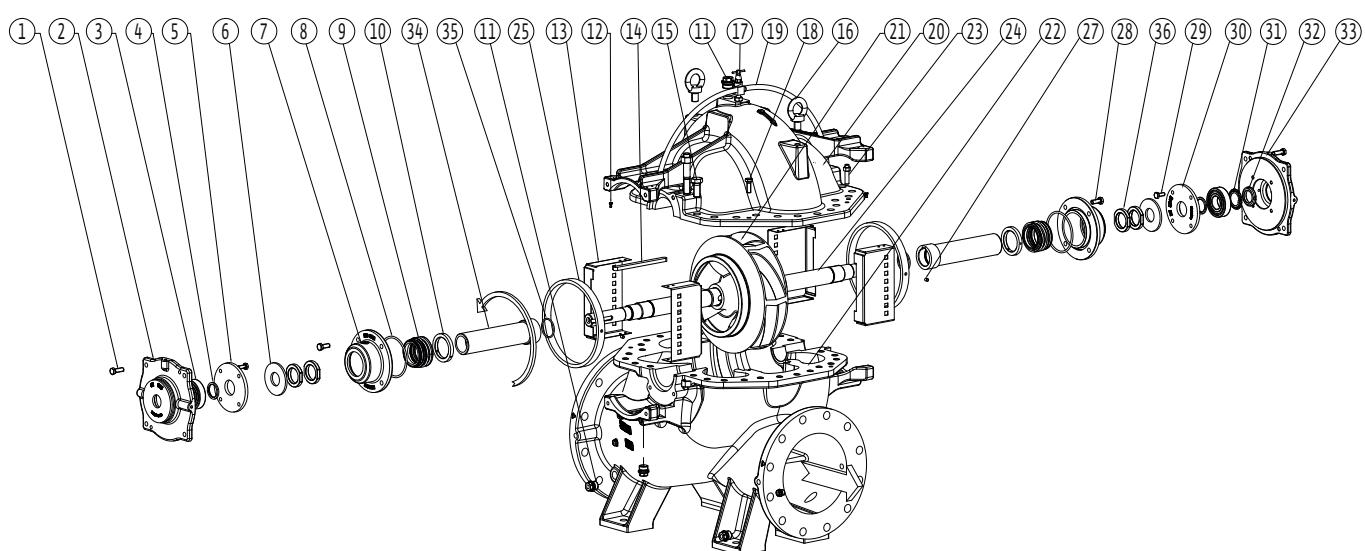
Exploded view of Atmos TERA-SCH hydraulic (mechanical seal version with sleeves)
